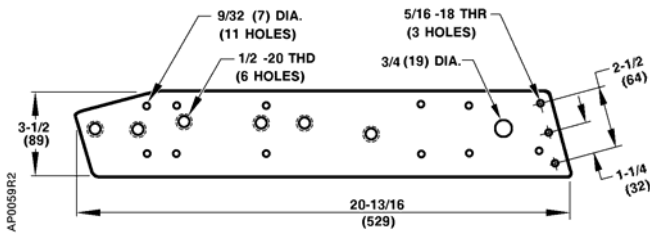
Actuator Mounting Plate 331-623, 1/4-Inch (6 mm) Thick. Dimensions in Inches (Millimeters).
